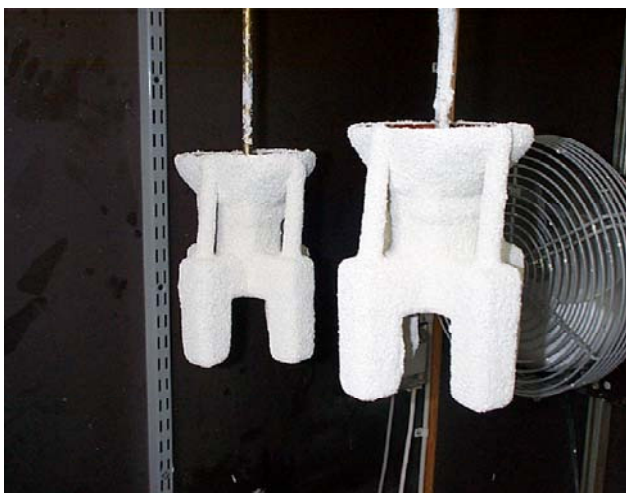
4-piece molds used in the study as ready for dewaxing. Molds were dewaxed by flash dewaxing method at 750°C and subsequently sintered for about 2 hours in a sintering furnace at 800-950°C.
